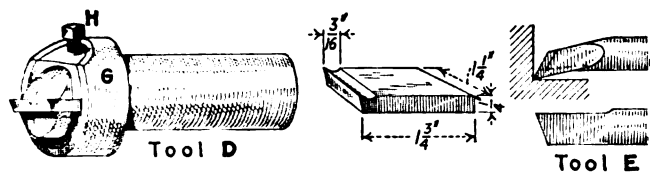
ROUGHING AND FINISHING RECESSING TOOLS
